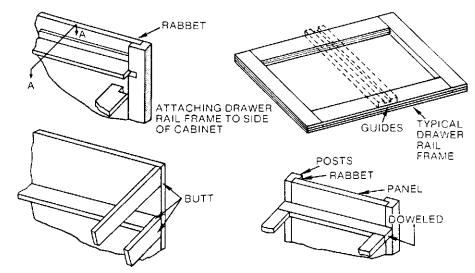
Drawer supports, or rail frames, are integral parts of case construction. Some typical assembly methods are shown here. Many rail frames are done with thin inset plywood panels so they serve as dust guards between drawer sections.
